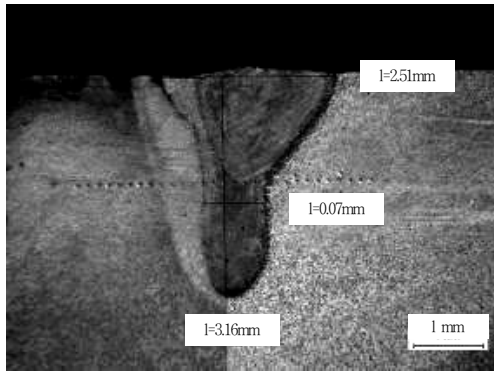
Disk laser welded differential: Material combination 16MnCr5 and GGG 60
